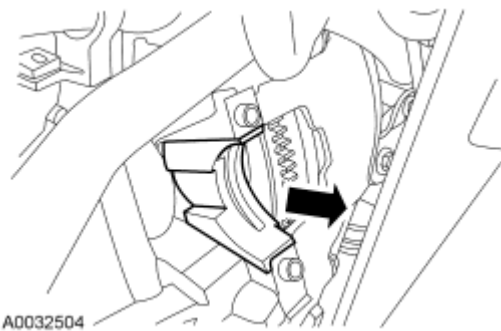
Locating Oil Filter Adapter Bolts
